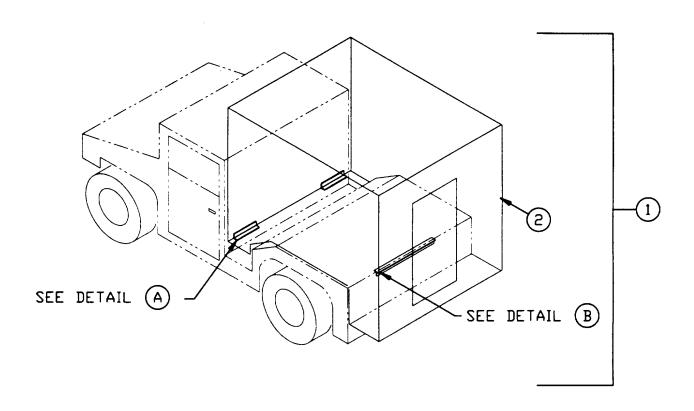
SHELTER AND MOUNTINGS (SHEET 1 OF 3)
